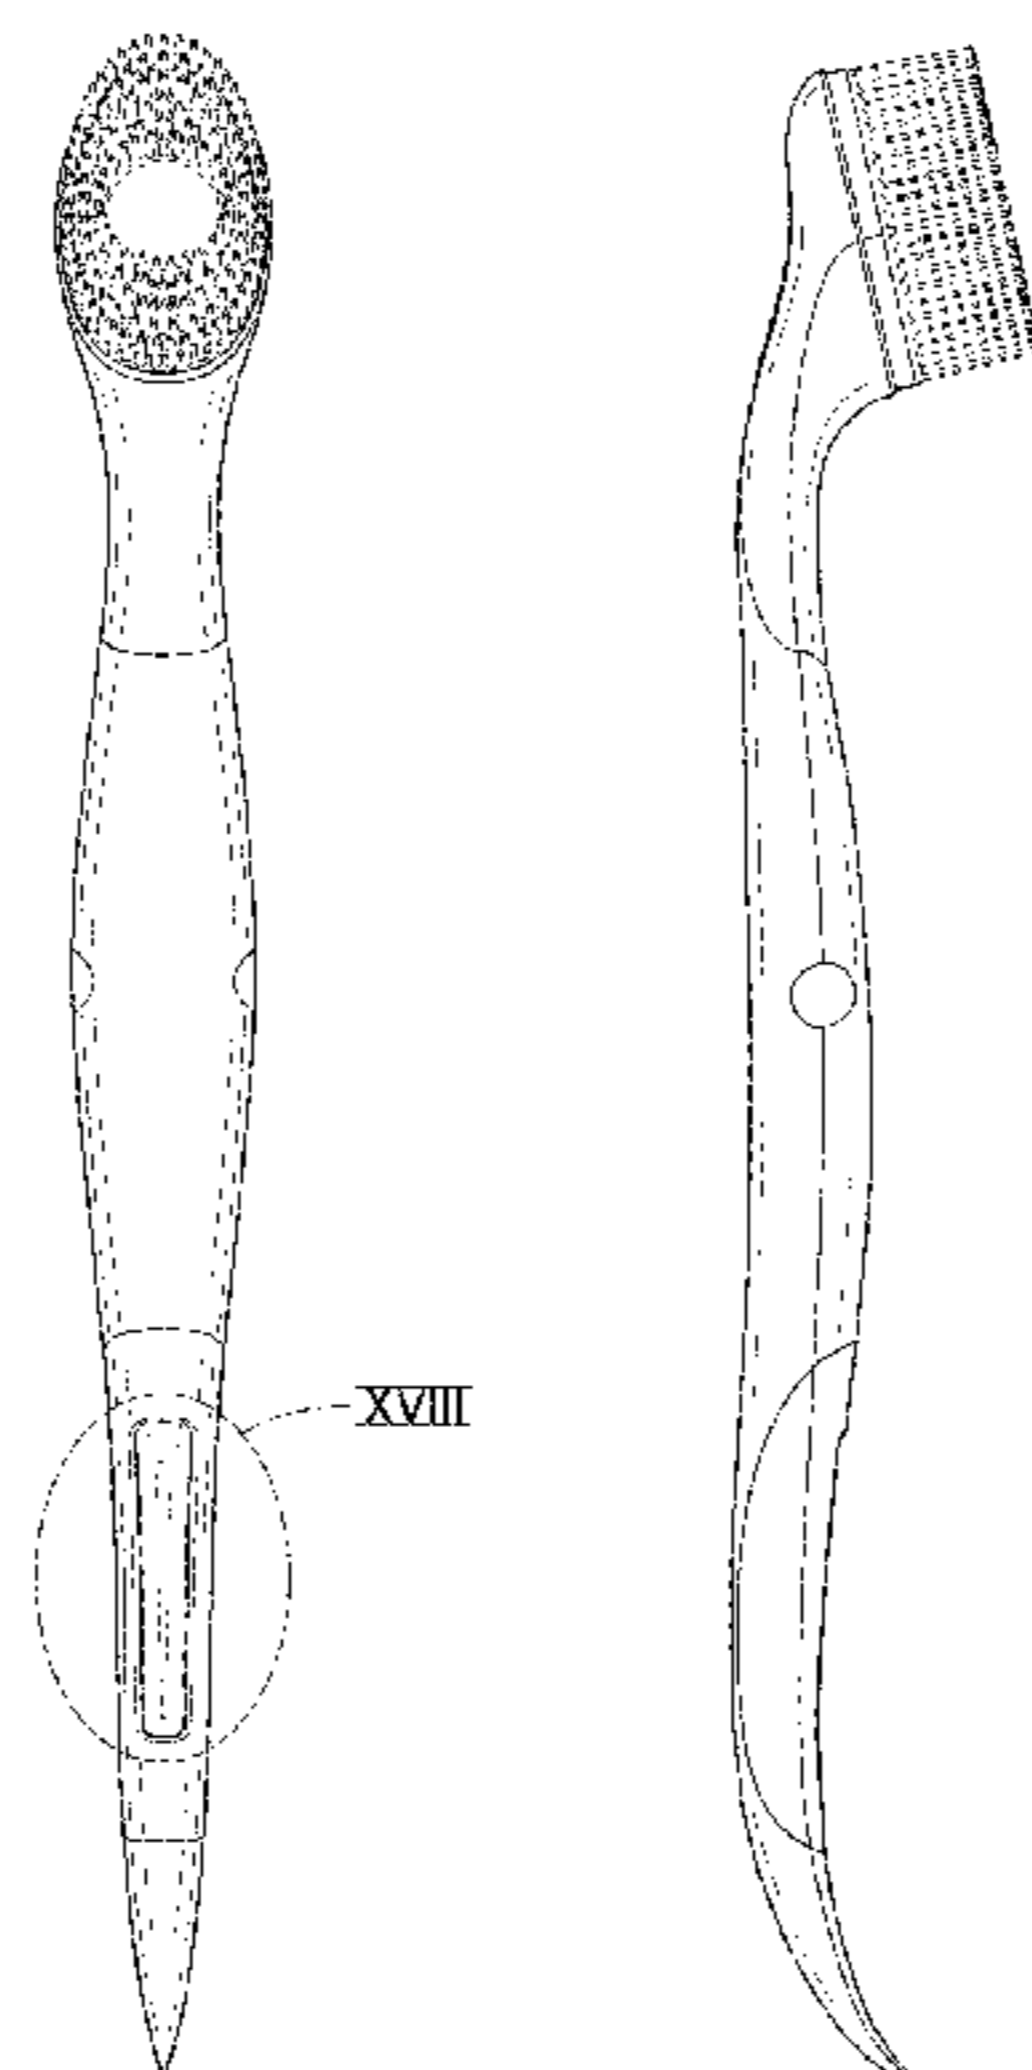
is a bottom view of the toothbrush of FIG. 9.
